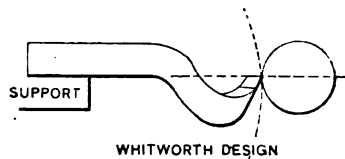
Design of Tool Permitting it to Spring away from Work.
